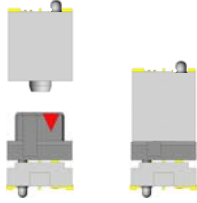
Mating of Top Half and Bottom Half of Connector A
